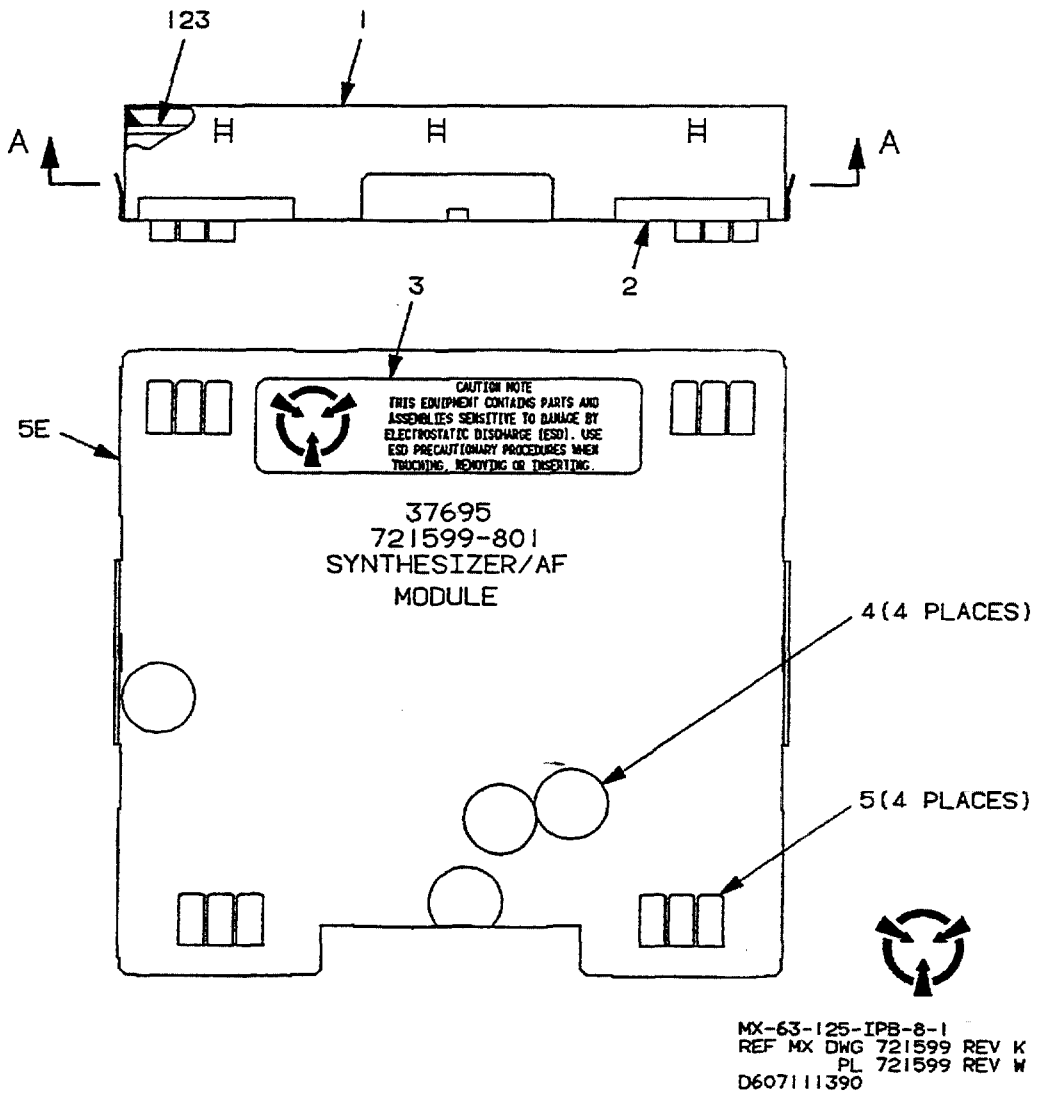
Synthesizer/AF Module Assembly (Sheet 1 of 5)
